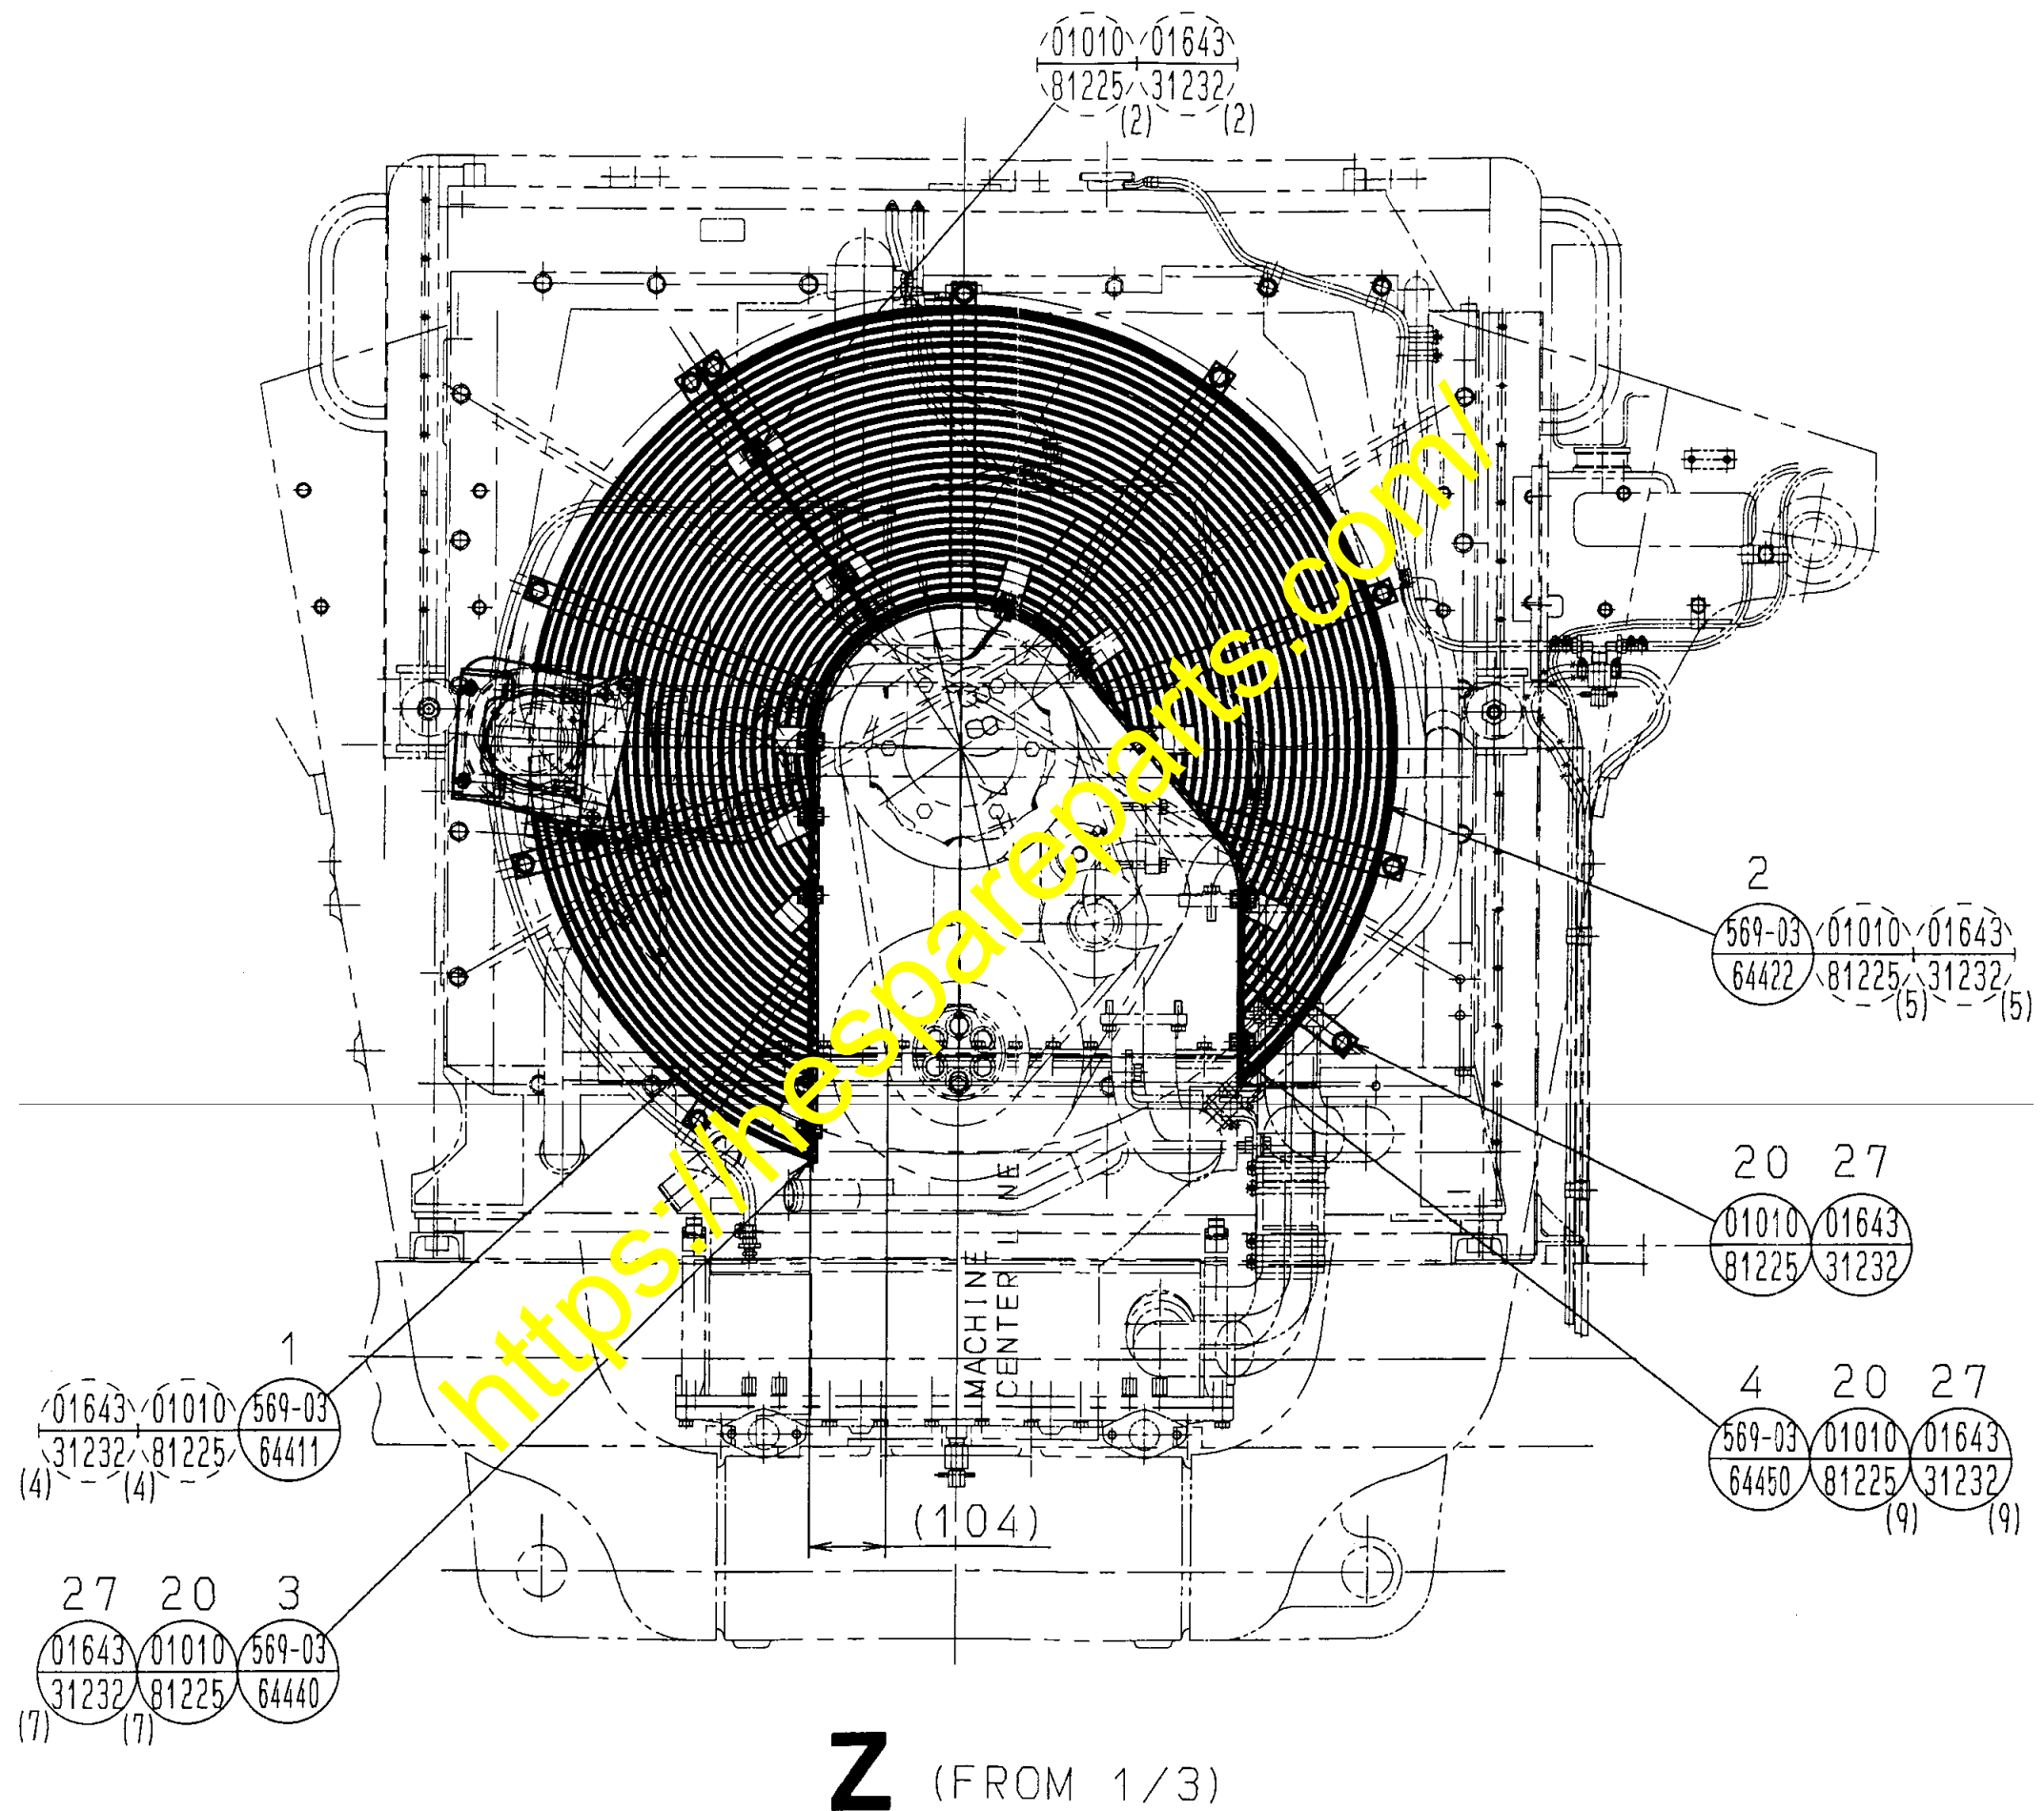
Installing the fan belt cover and the air conditioner compressor cover (2/3)
